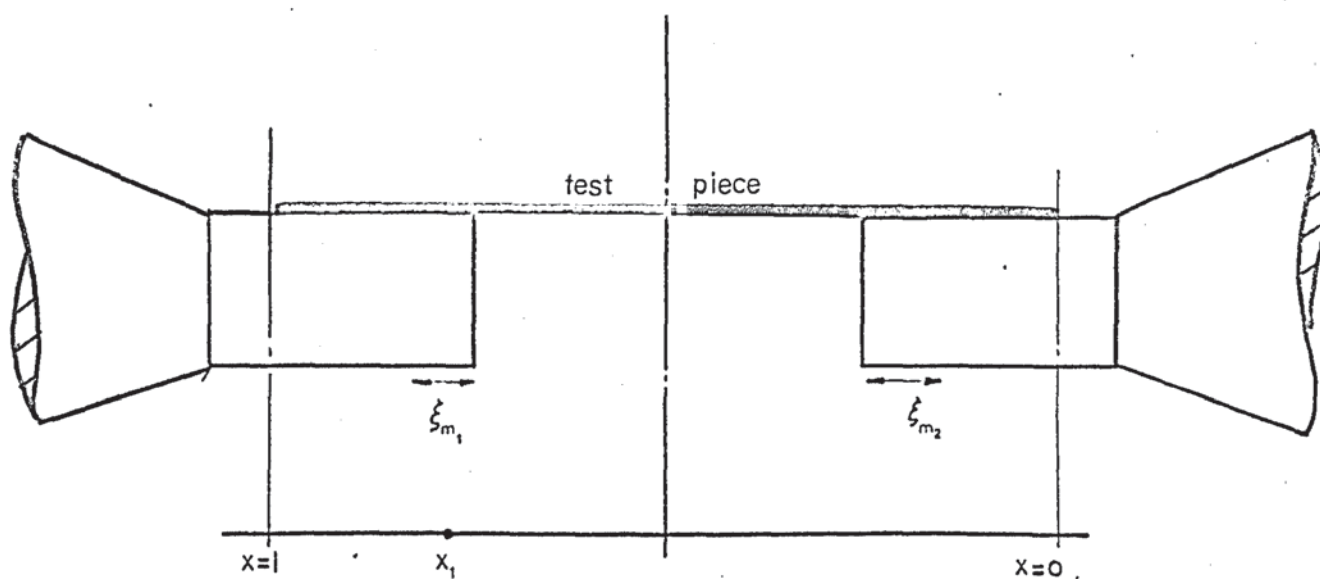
Definition of effective wave path during wedge drawing with the roller radius assembly.
